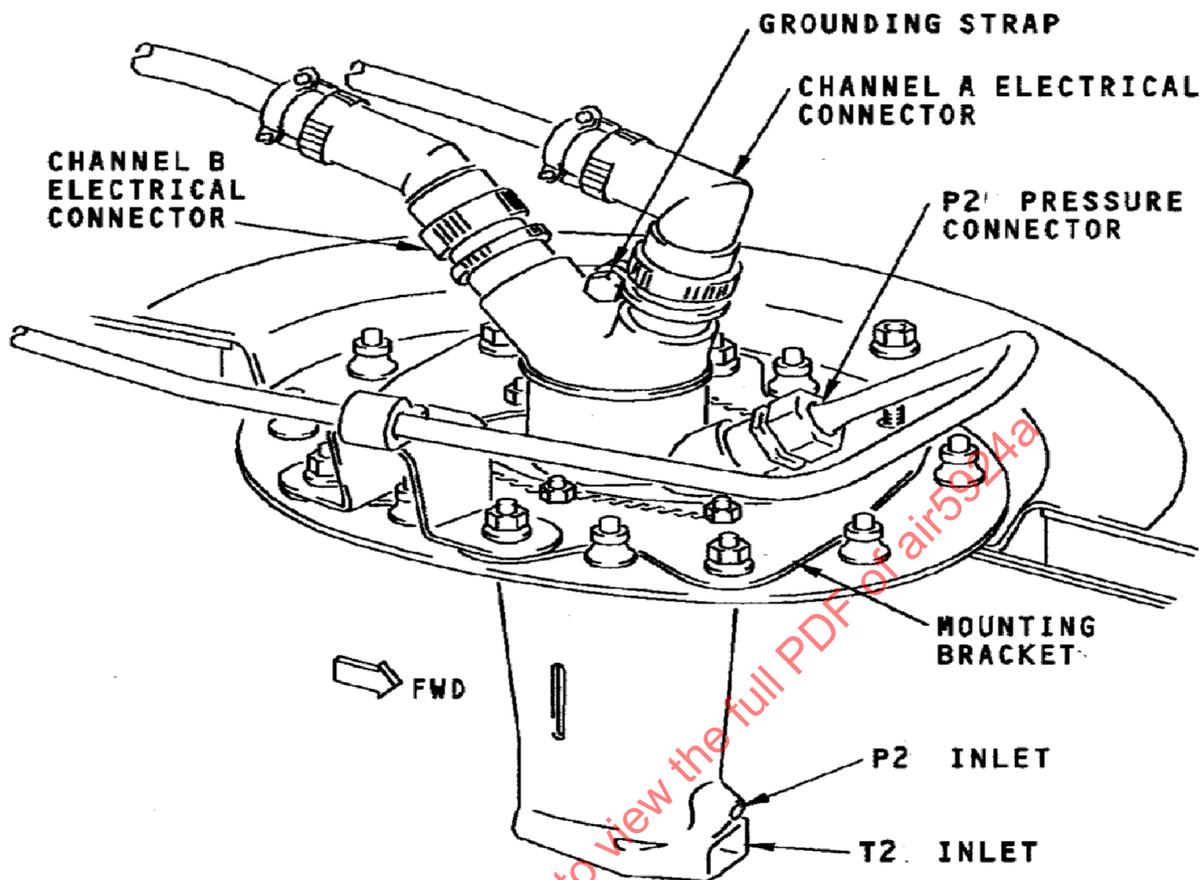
ENGINE INLET MOUNTED P2/T2 PROBE
